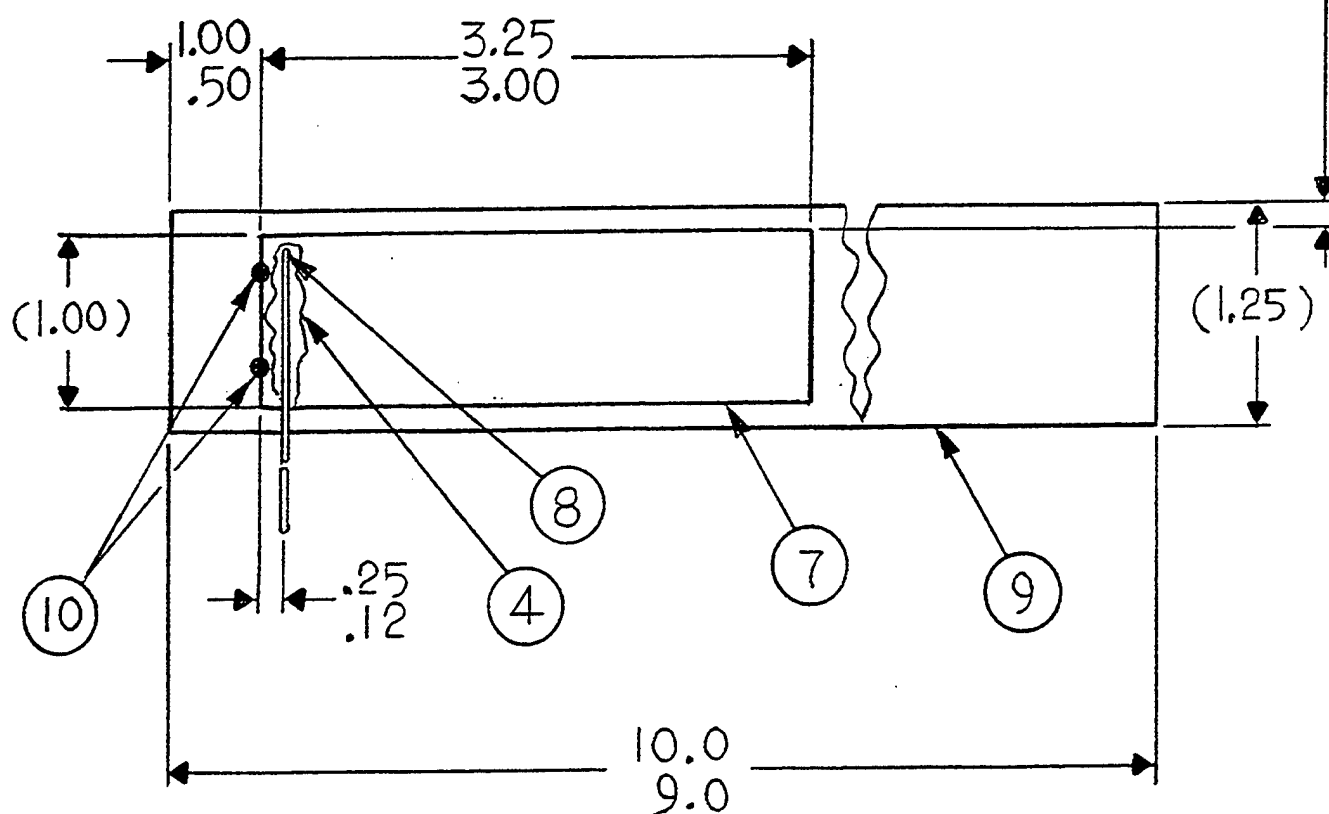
STRAP ASSEMBLY (SHIELD)
